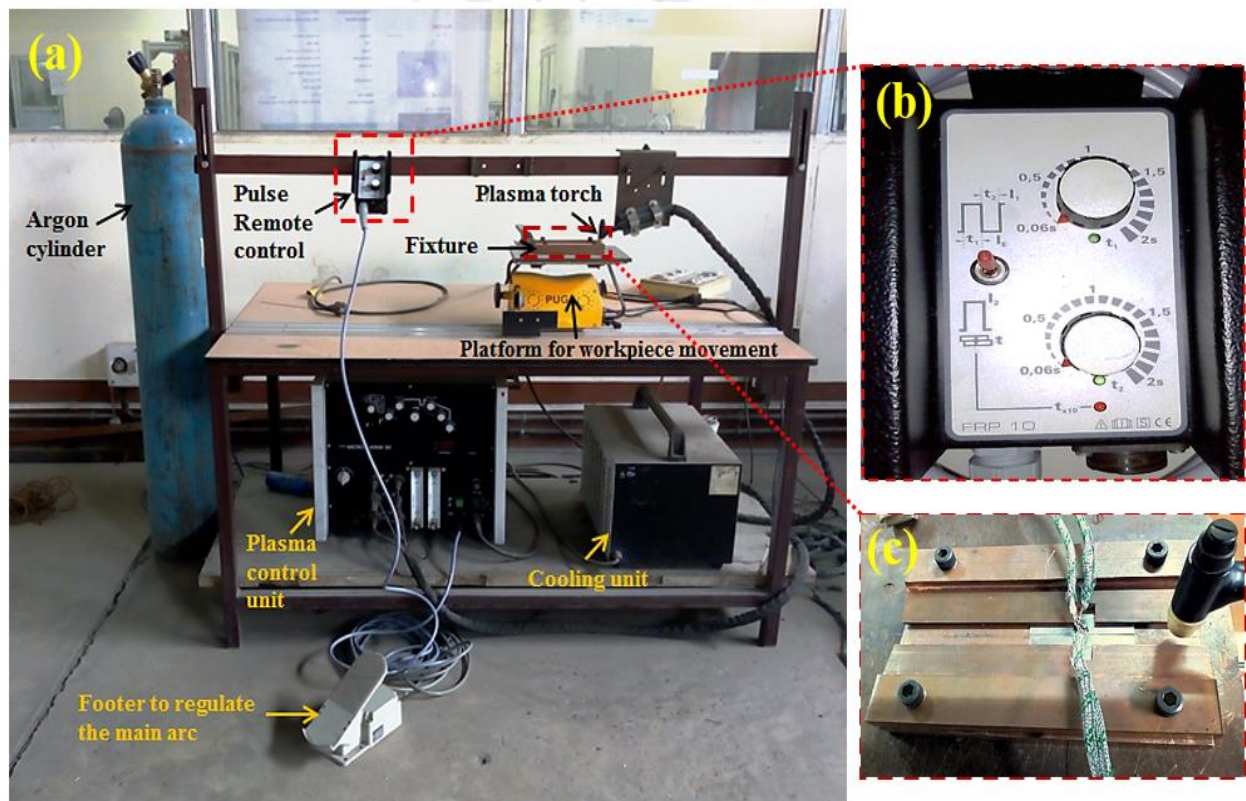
(a) Experimental set-up of micro plasma arc welding process (b) Pulse remote and (c) Copper fixture
